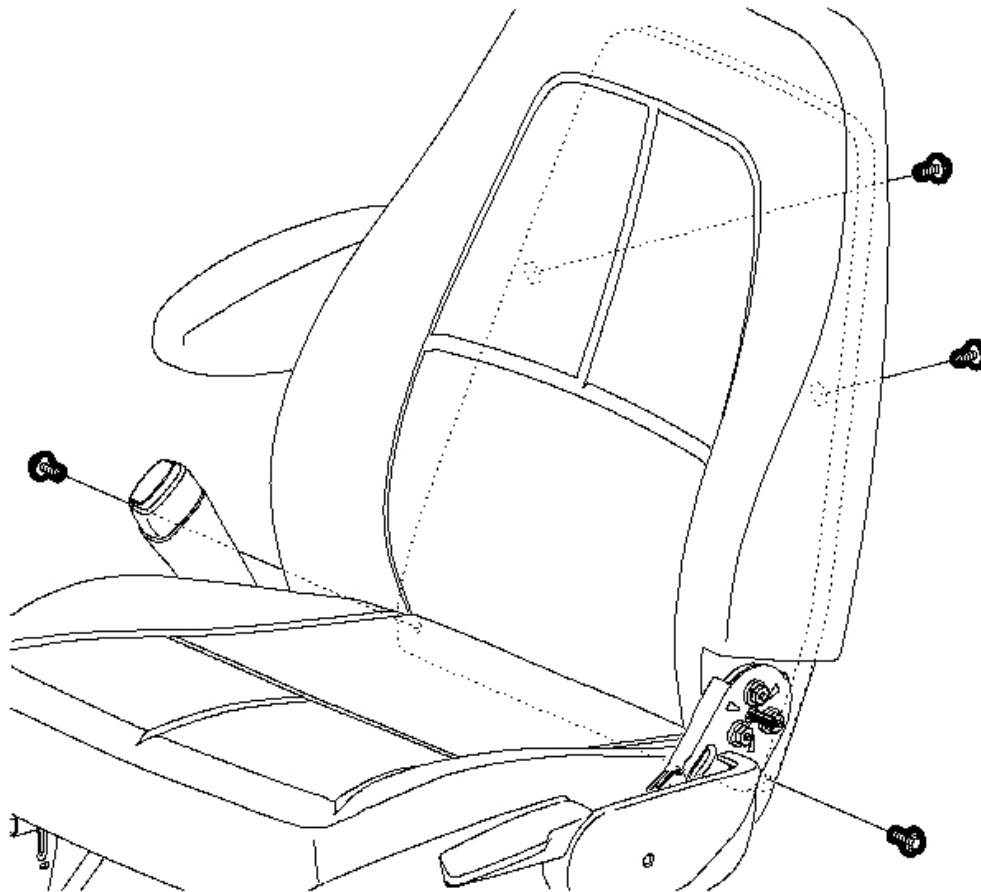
Removing/Installing Screws From The Seat Back Panel
